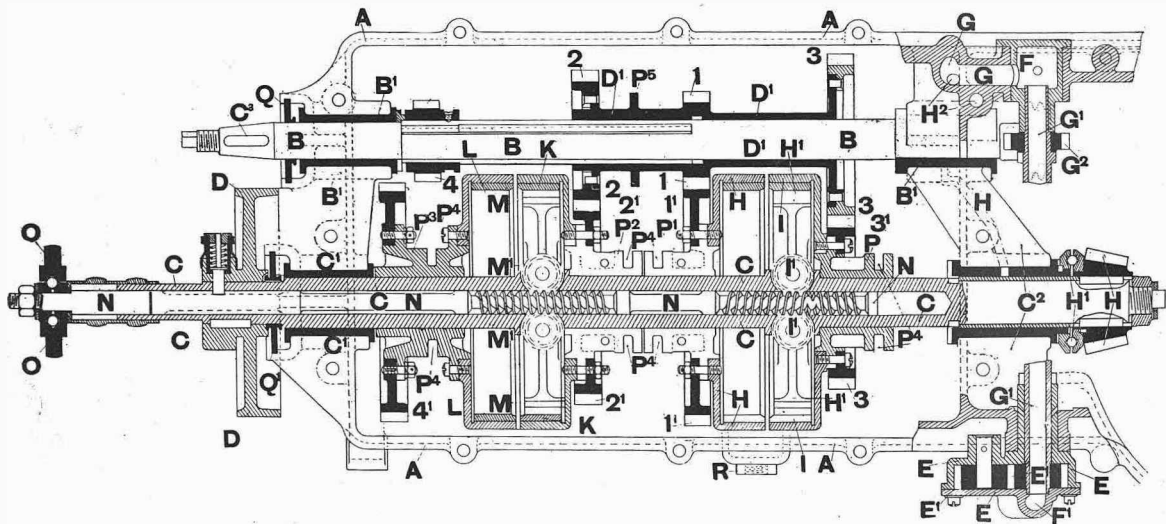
Sectional elevation of the three-speed and reverse gear.
